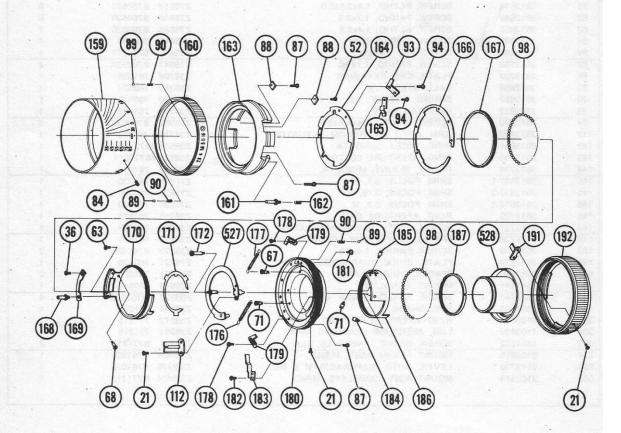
Canon FL, FD Mount Assembly, Complete (Ref 539, Pg 55)
